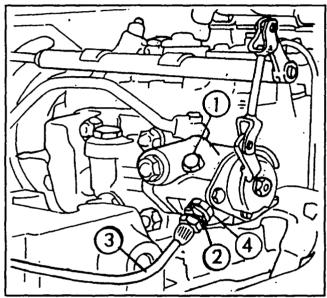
Remote Control Valve, Single Action Cylinder 1. Plug; 2. Metric to SAE Threaded Adaptor; 3. Hose; 4. Adaptor
